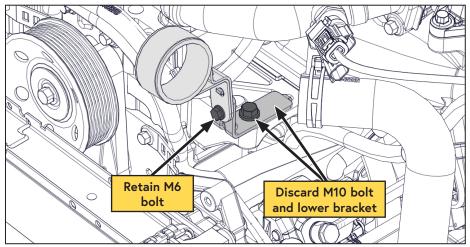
Radiator hose support bracket (Upper hose removed for clarity)
